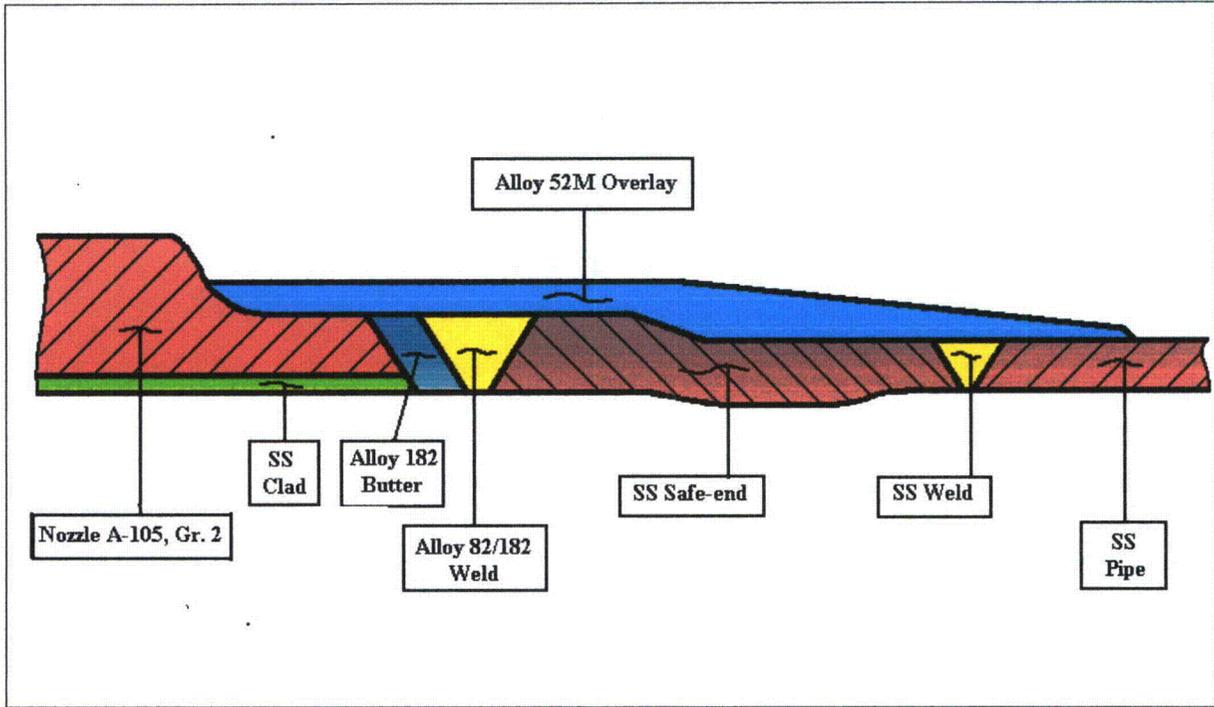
Illustration of Typical Weld Overlay Design
